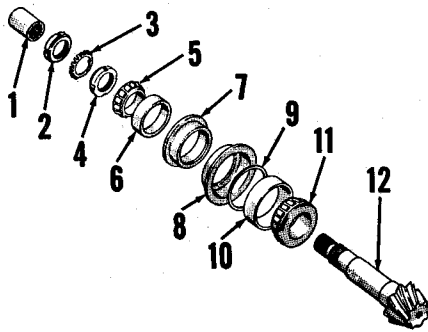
Exploded view of bevel pinion assembly. Pinion bearing cups (6 and 10) are supported in sleeves (7 and 8) which fit in bores of rear axle center housing. Bearings are adjusted by nuts (2 and 4); refer to text.
